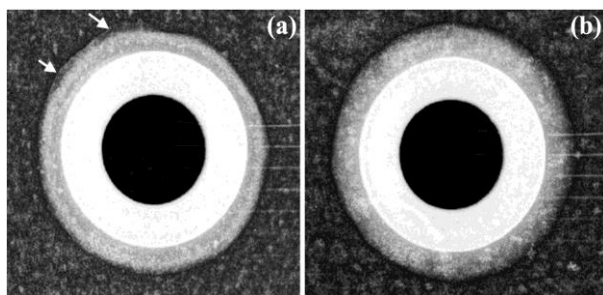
Radiographic testing of (a) MAG-M, and (b) SAW welded samples.
